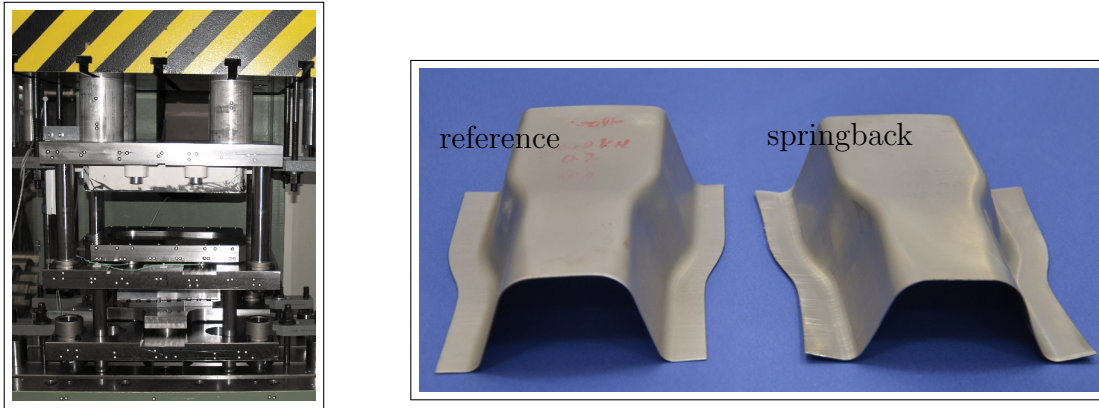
Sheet metal forming press at IUL (left), formed parts without and with springback (right).
